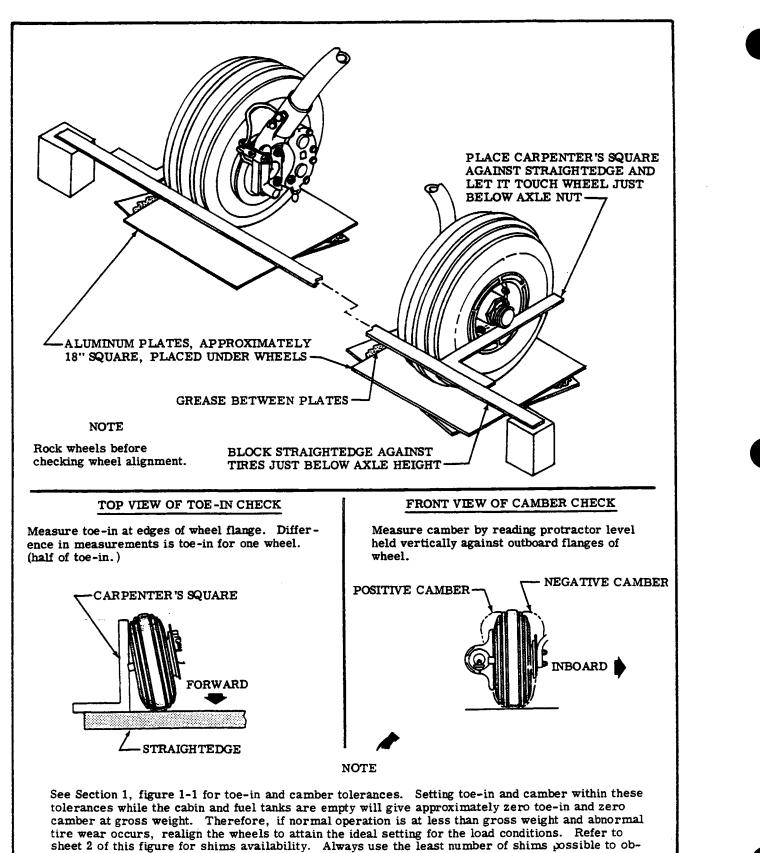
Wheel Alignment (Sheet 1 of 2)
